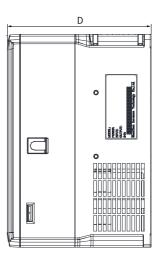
Outline dimensions and mounting dimensions of T1 to T4 models
